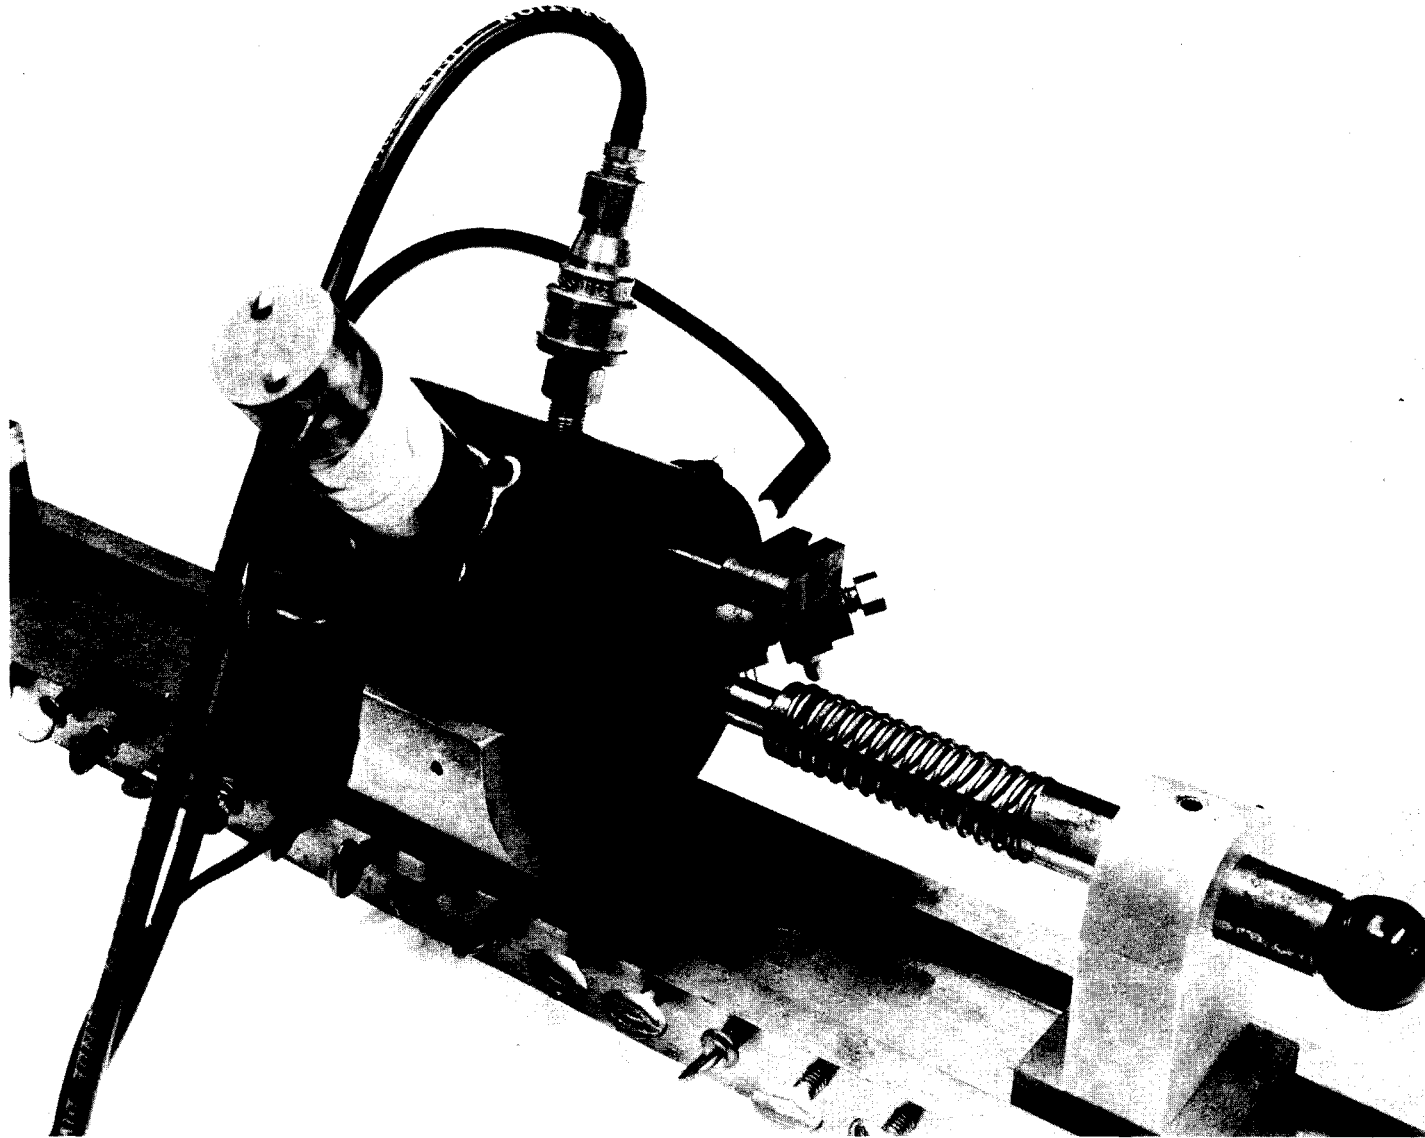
End Closure Welding Device with Rotating Electrode
